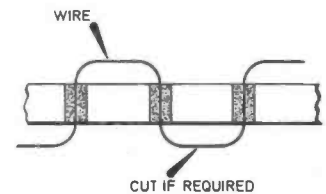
Forming a "bus" on Wonderboard. In this way a strip of conductive holes can be used similar to that on stripboard.
